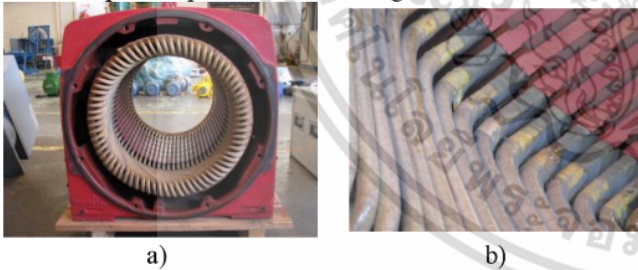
a) Three phase, 6,600 kV motor before rewinding. b) Surface contaminant at stator winding.
